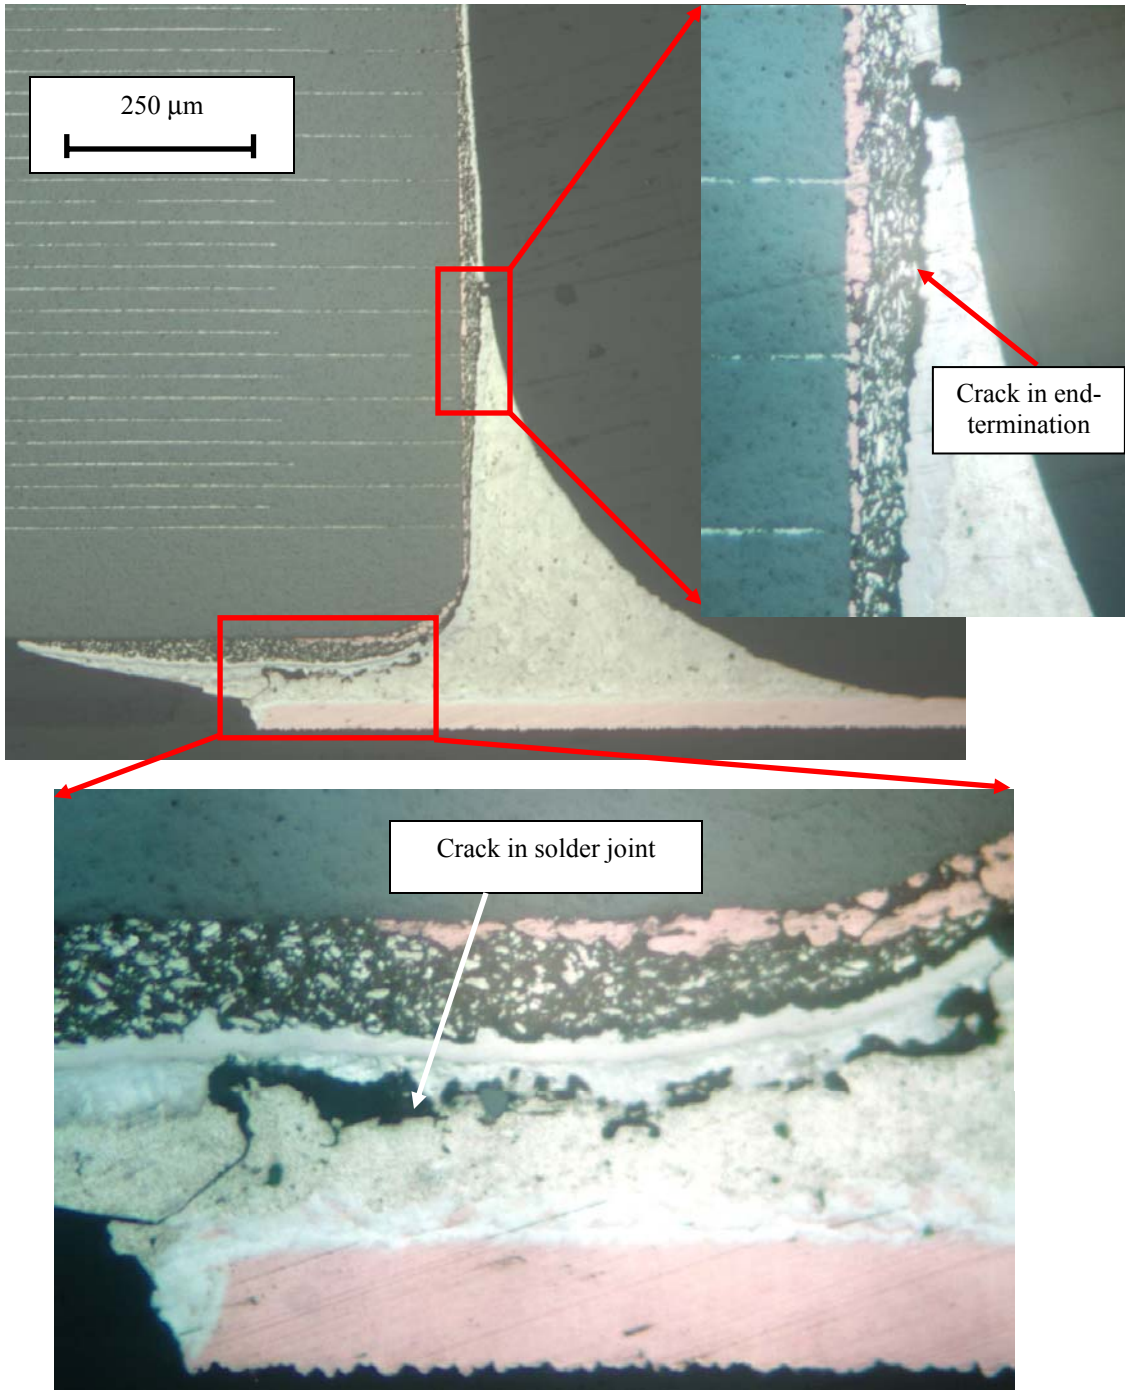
Crack in solder joint and end-termination of a flexible-termination MLCC manufactured by AVX and tested in a four point bend test.
